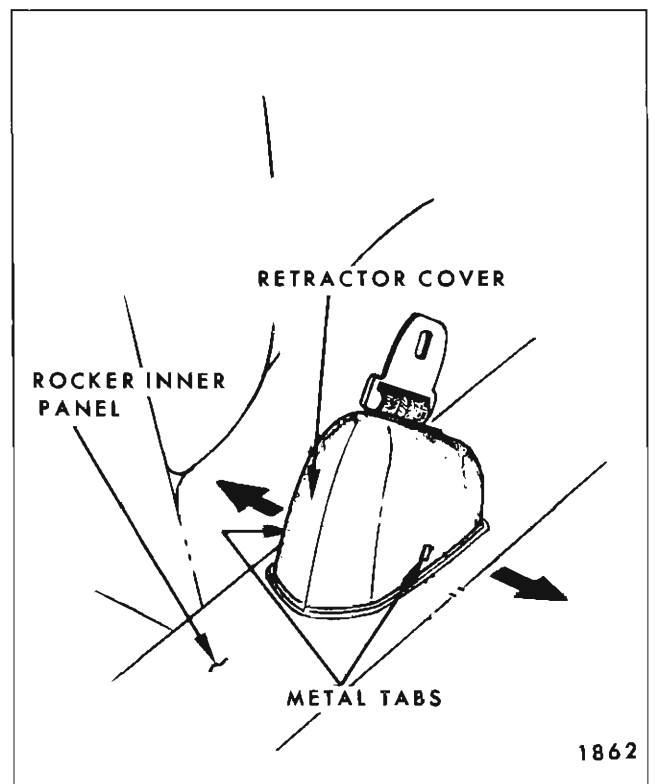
H47—Removal of Seat Belt Retractor Cover -
